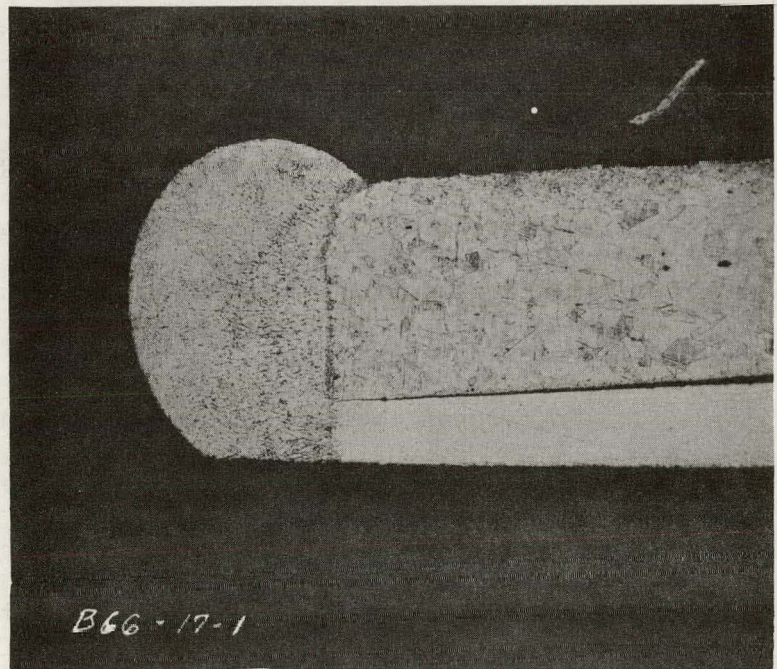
Typical weld zone on recessed cup-cap.
